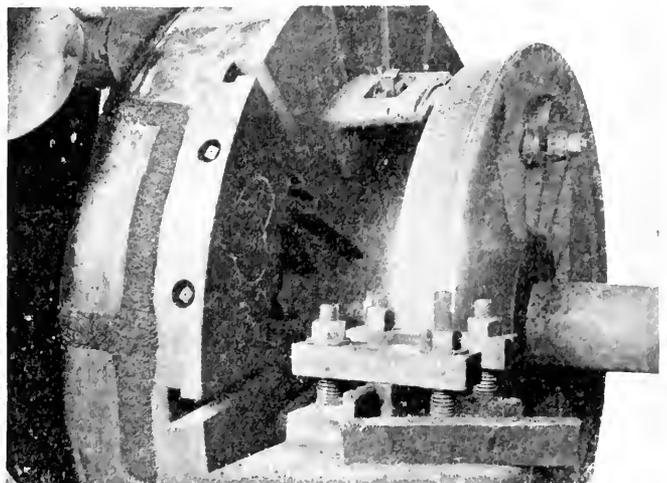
Large Lathe Chuck Repaired with Bare Electrode using 175 amp., Cost \$21.00
